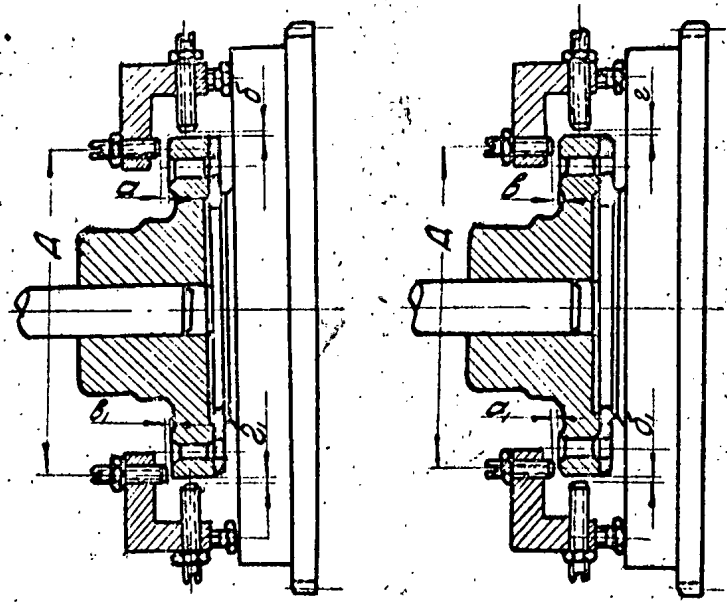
Arrangement of Shaft Aligning Device on Engine Flywheel.
